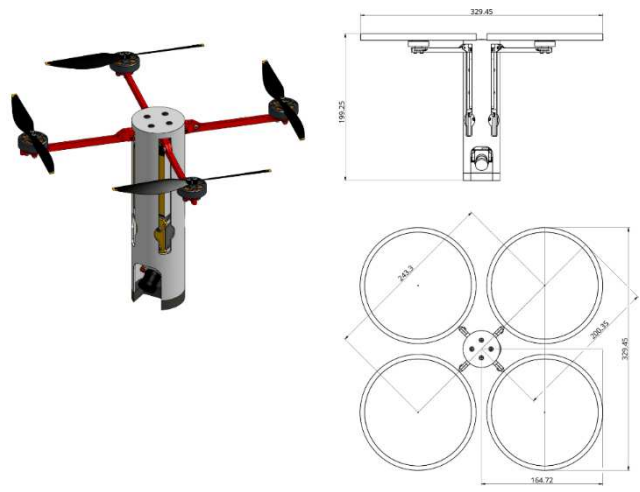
Three-view drawing of quadcopter in deployed configuration at maximum operating empty mass (MOEM). Dimensions shown in millimeters
